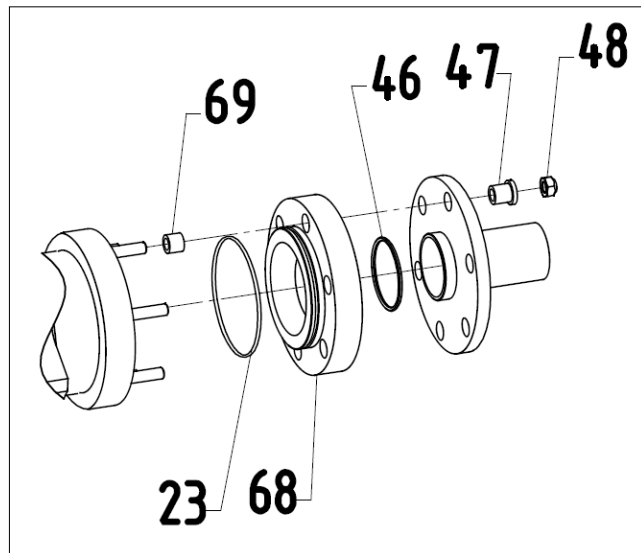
Propeller Assembly Part 9 - spacer (optional)
